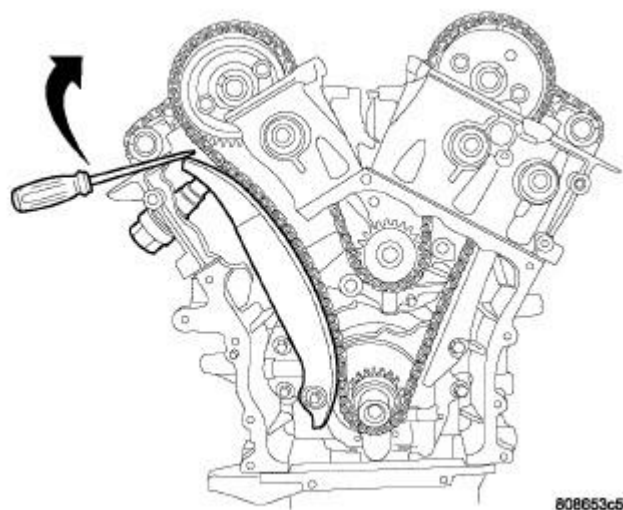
TIMING CHAIN TENSIONER ACTIVATING
